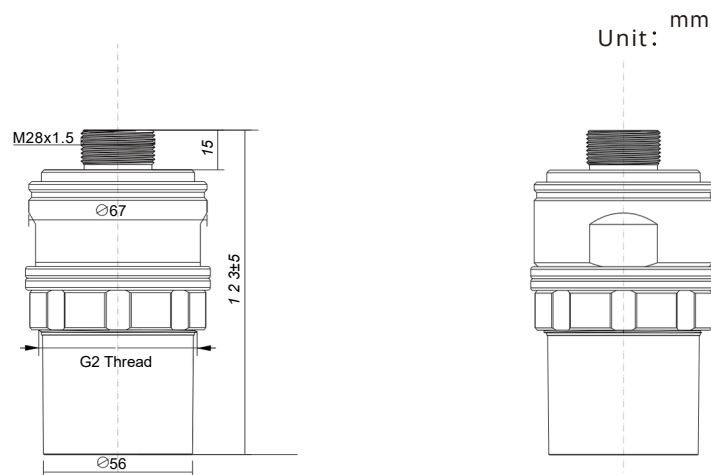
5/10m ultrasonic sensor dimensions (unit: mm)
